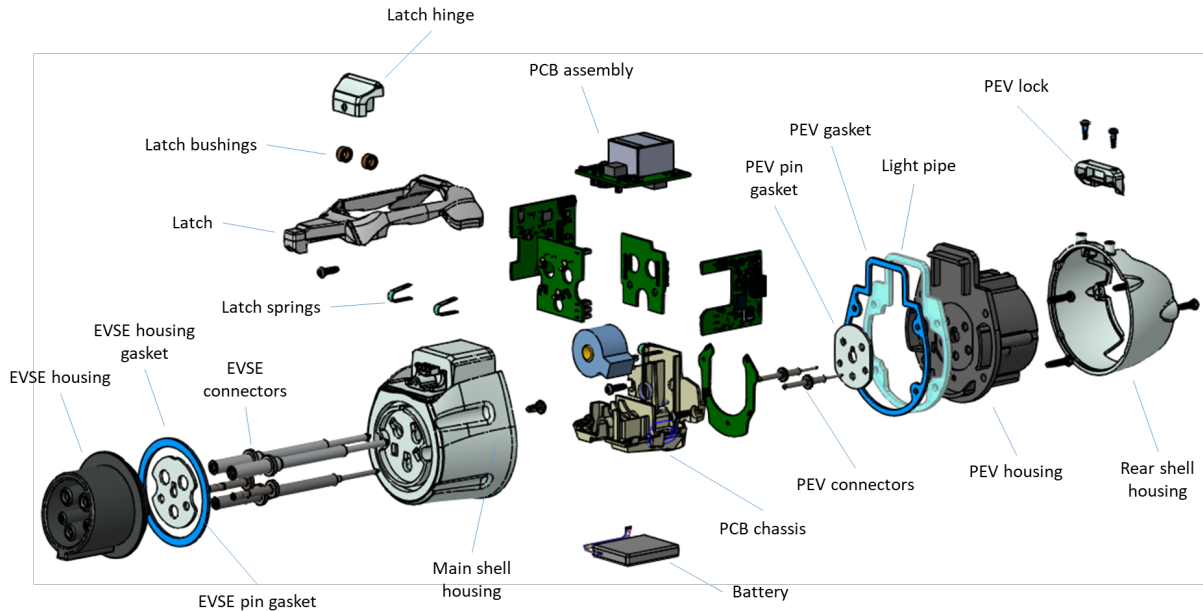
Exploded View of Commercial Alpha Smart Charge Adapter
